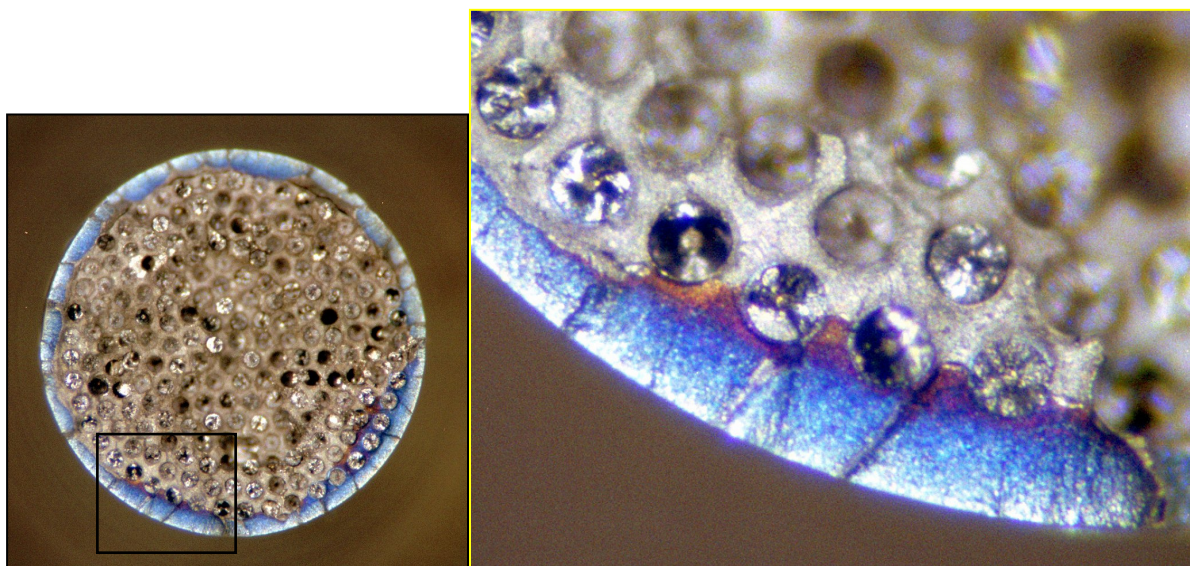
Fracture surface with circumferential matrix fatigue crack of specimen thermomechanically out-of-phase cycled at 1700-170 MPa and 100°C-550°C (right: magnification of indicated area in left)
